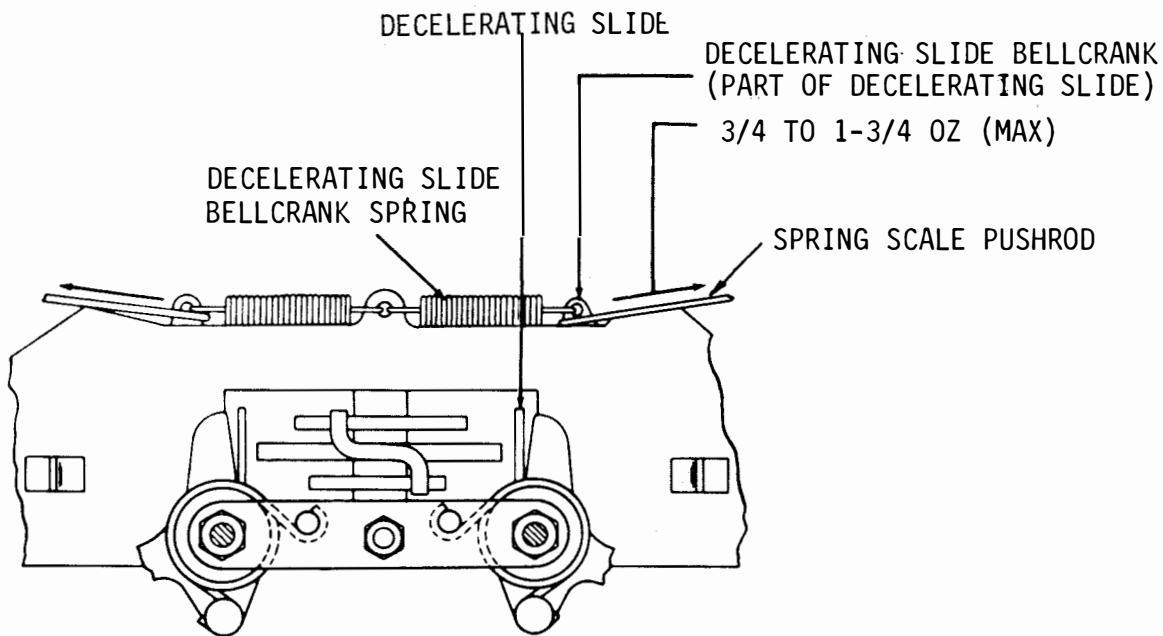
Decelerating Slide Bellcrank Spring, Front View
